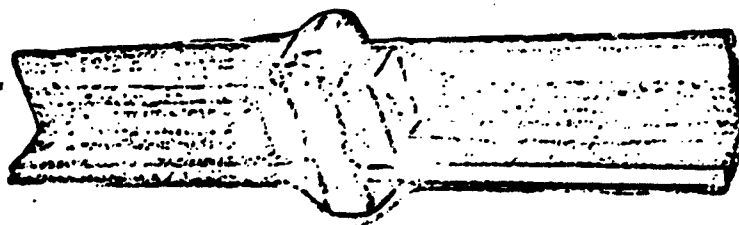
Welded joint between extruded sections, with inserts.
